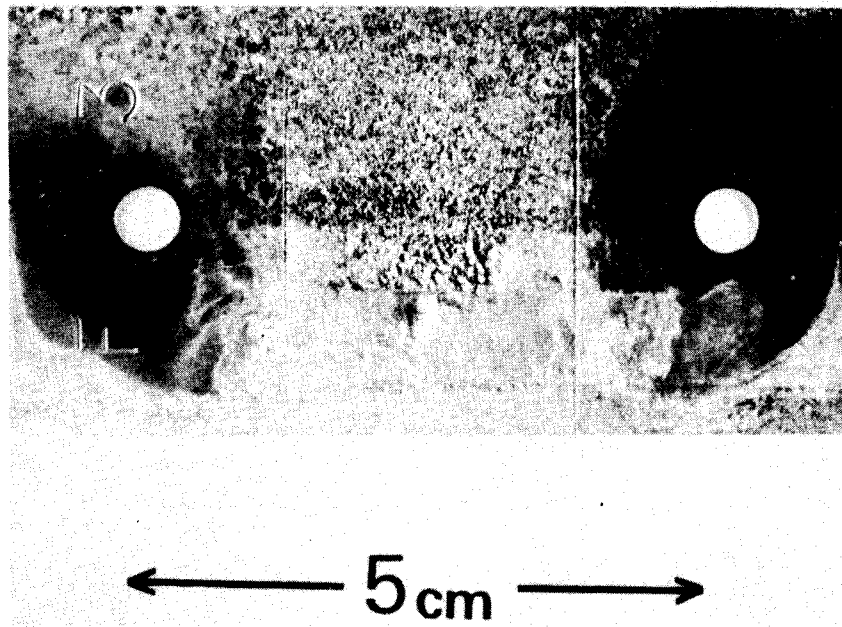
Welded niobium modified 70/30 copper nickel sample showing greater depths of attack within HAZ in centre of sample.
